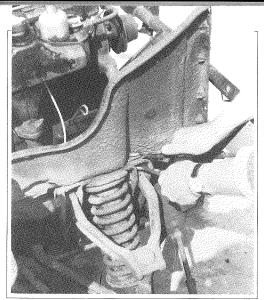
Full access is now available to unbolt the radiator. The other end of the adjuster bar can also be removed followed by the engine bay valances.
